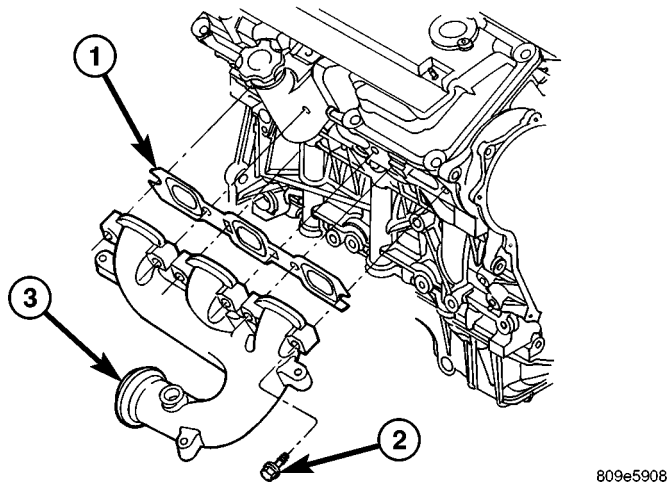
EXHAUST MANIFOLD - RIGHT SIDE
